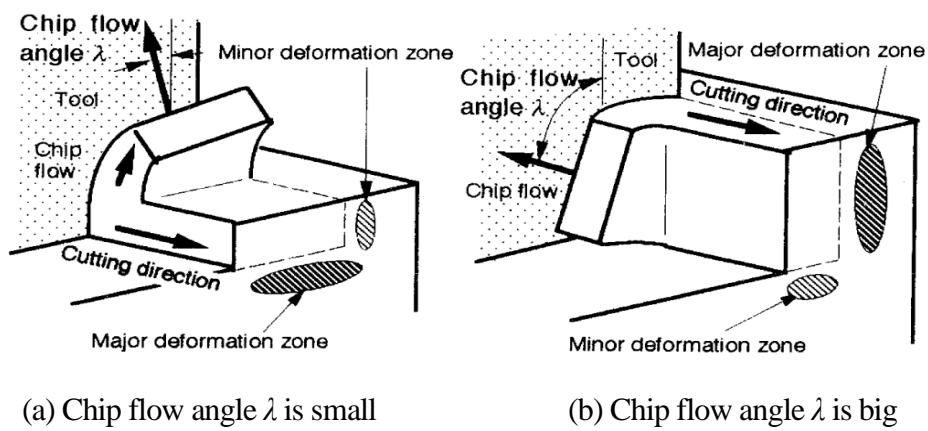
Identification of burr locations in end milling¹⁾.
